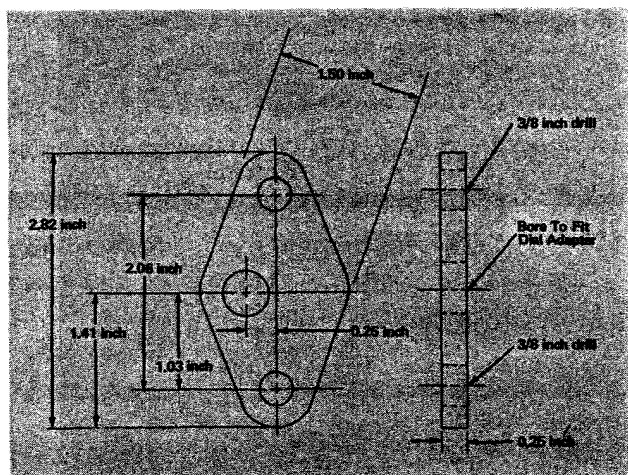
, (TA-45). Dial indicator adaptor for T-18A turbocharger
